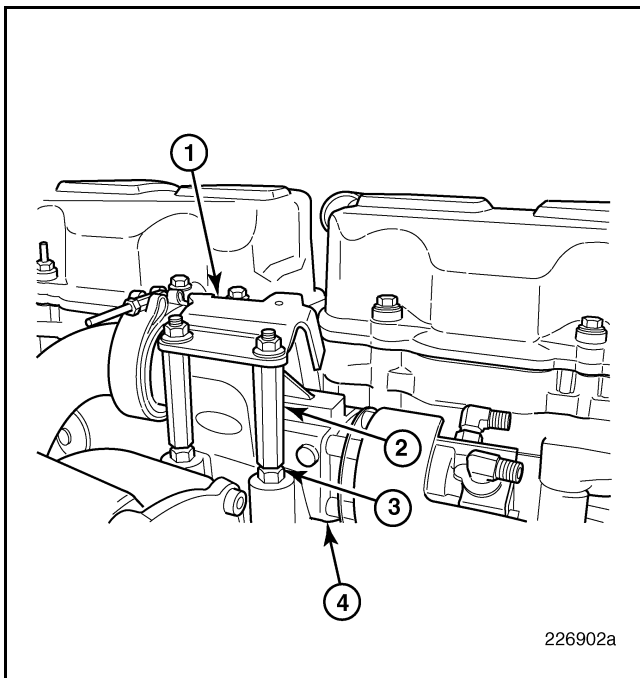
EGR Valve (Shown with One-Piece Cool Tube Mounting Bracket)
